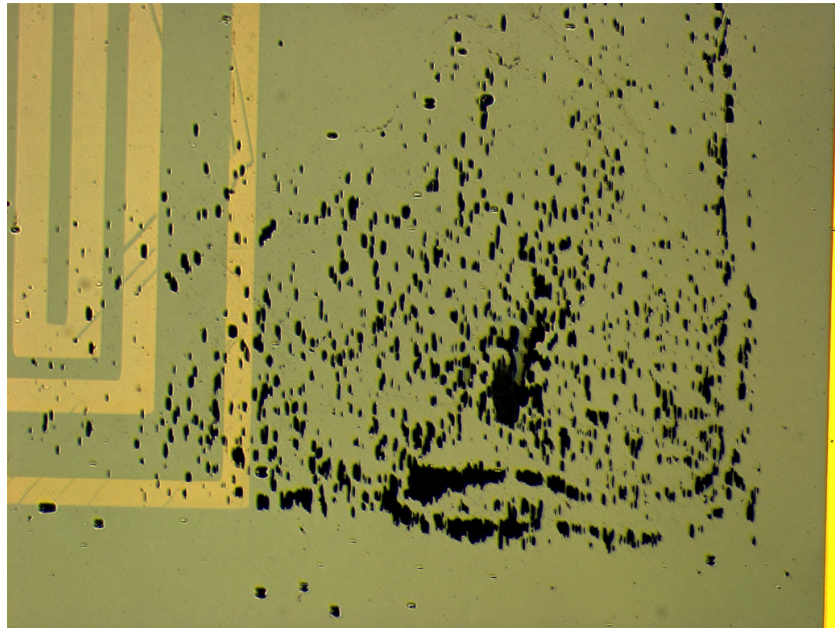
Corner of heater tracks on a cantilever. The etch has gone through the stop and damaged the cantilever.
